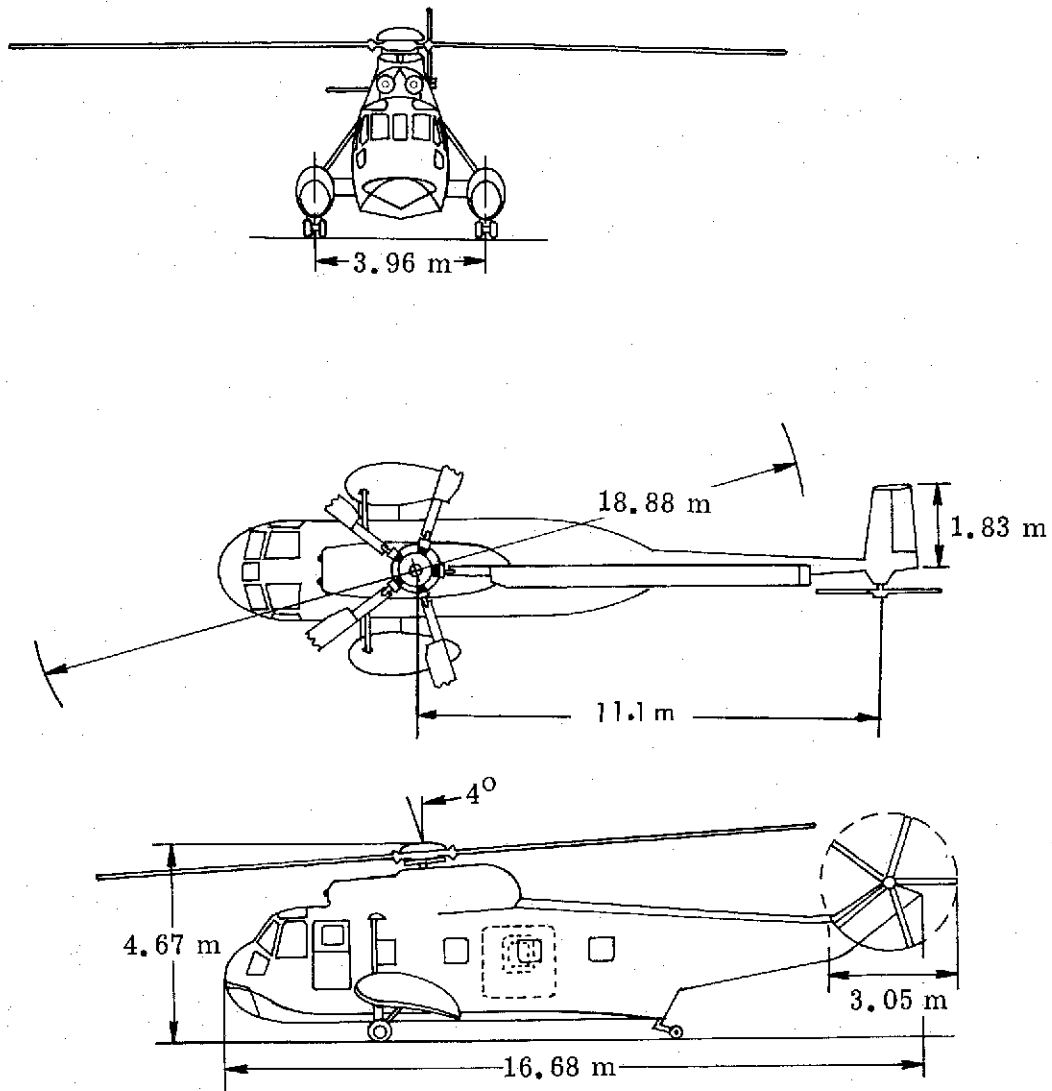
Three-view drawing of the Sikorsky SH-3A turbine helicopter.
